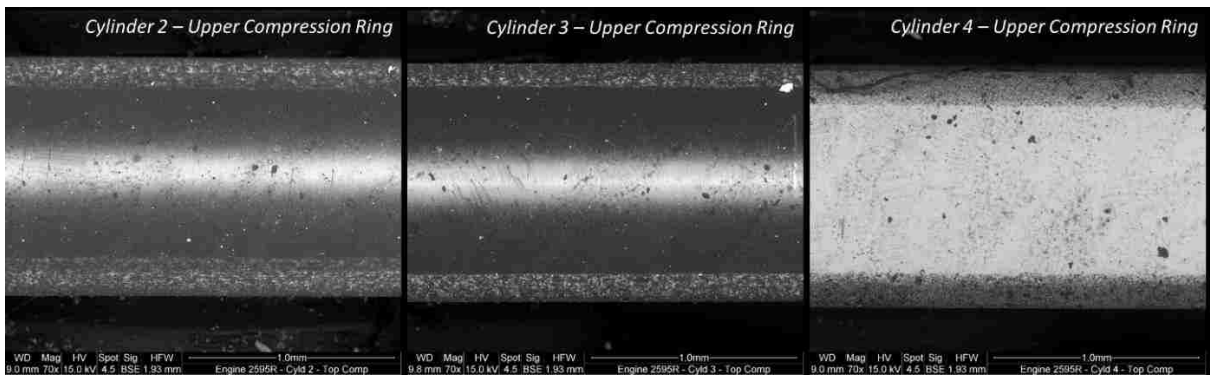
Dynamometer 4 - Engine 2595R - Upper Compression Rings - Cylinder 2-4
